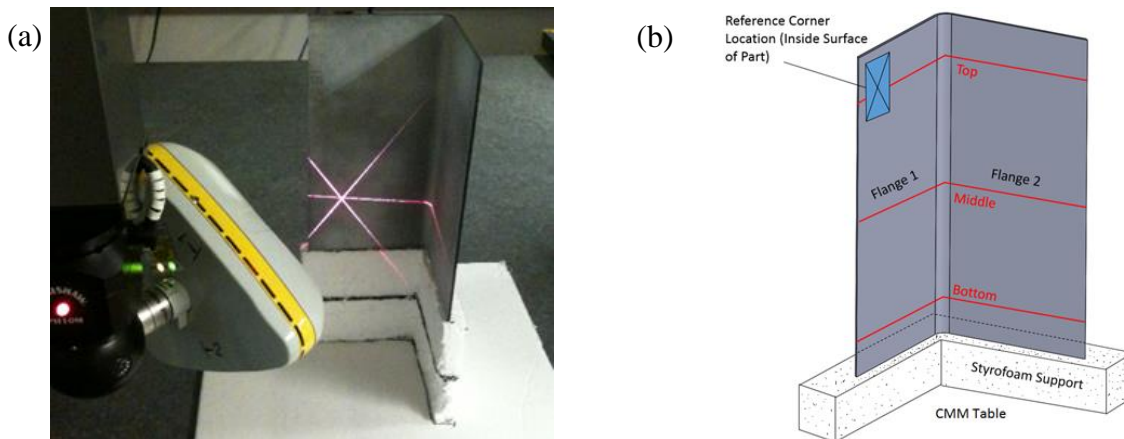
(a) Scanning the inside surface of the L-shape angle with the CMM laser head (b) Locations of cross-section lines for angle measurement (Courtesy Fortin [128])
